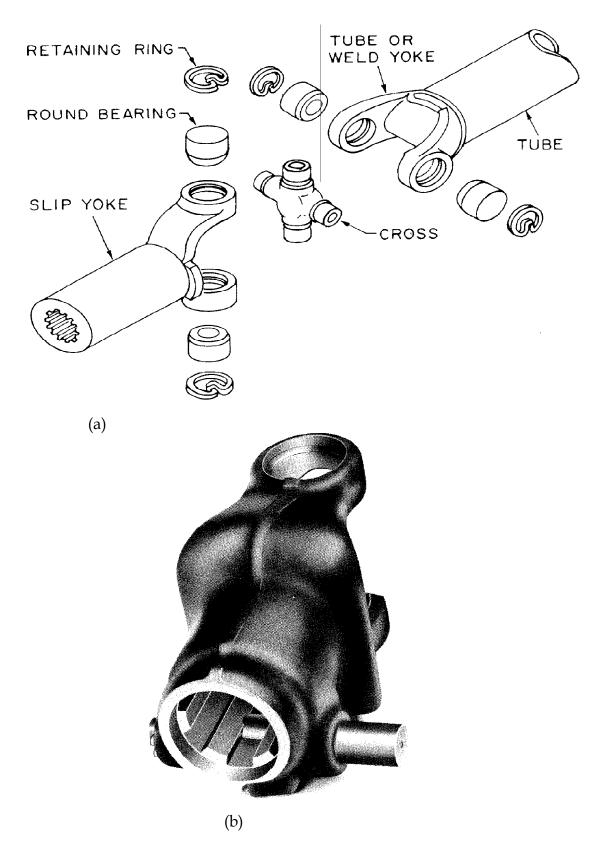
Universal joint showing metal removal, (a) shape of yokes blended with tubes, and (b) in smooth contours and rounded corners in yoke.
